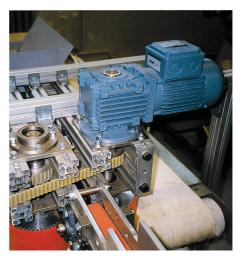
Example of the use of a worm-geared motor from the BS geared motor range
